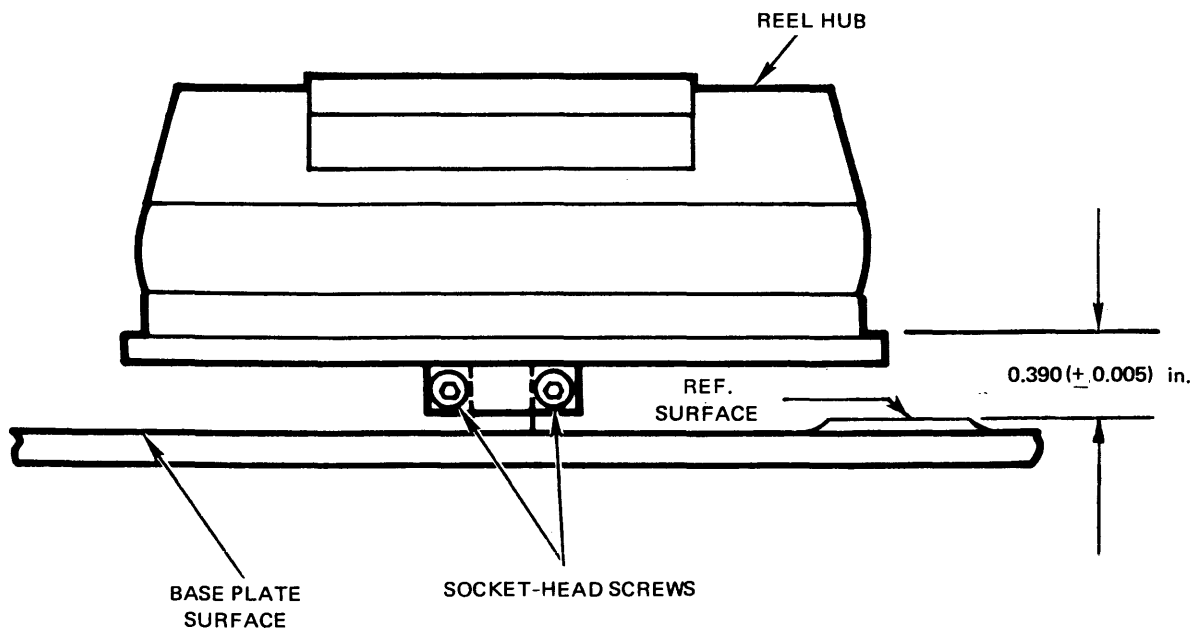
Reel Hub, Showing Adjustment Dimension
